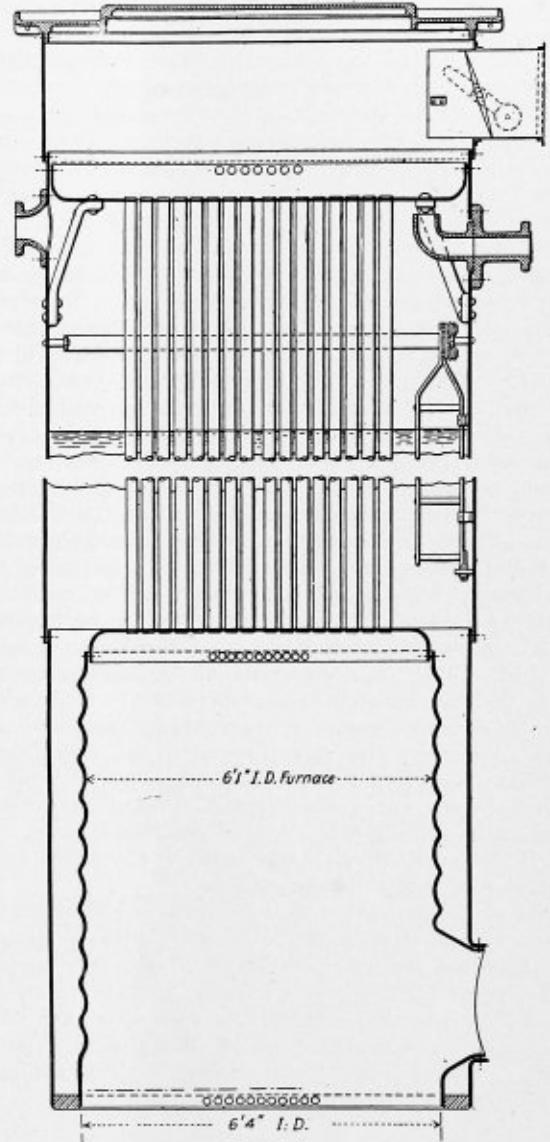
Larger Boiler of this Design, with Interior Accessible for Inspection
